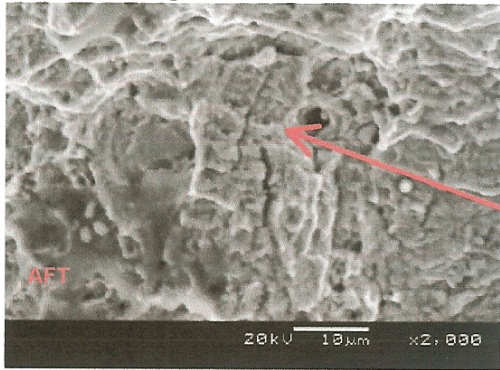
Fatigue striation marks on fracture surface, AFT end (x2000, SEM)
